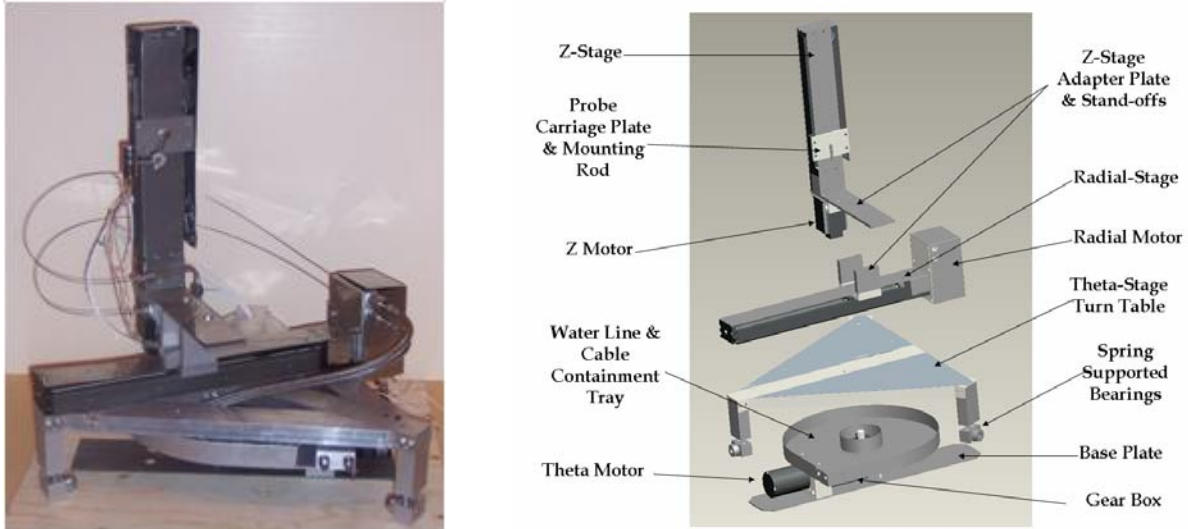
Mechanical design of the system. Three stepper motors are used to position a Faraday probe in a three dimensional space.
